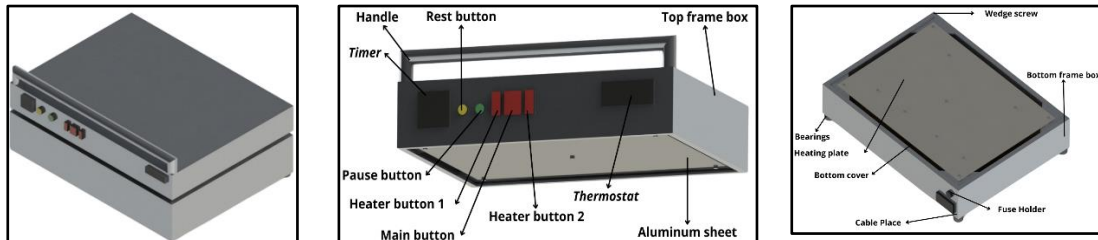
Design and Component Details of the Ironing Plate Heating Machine:
